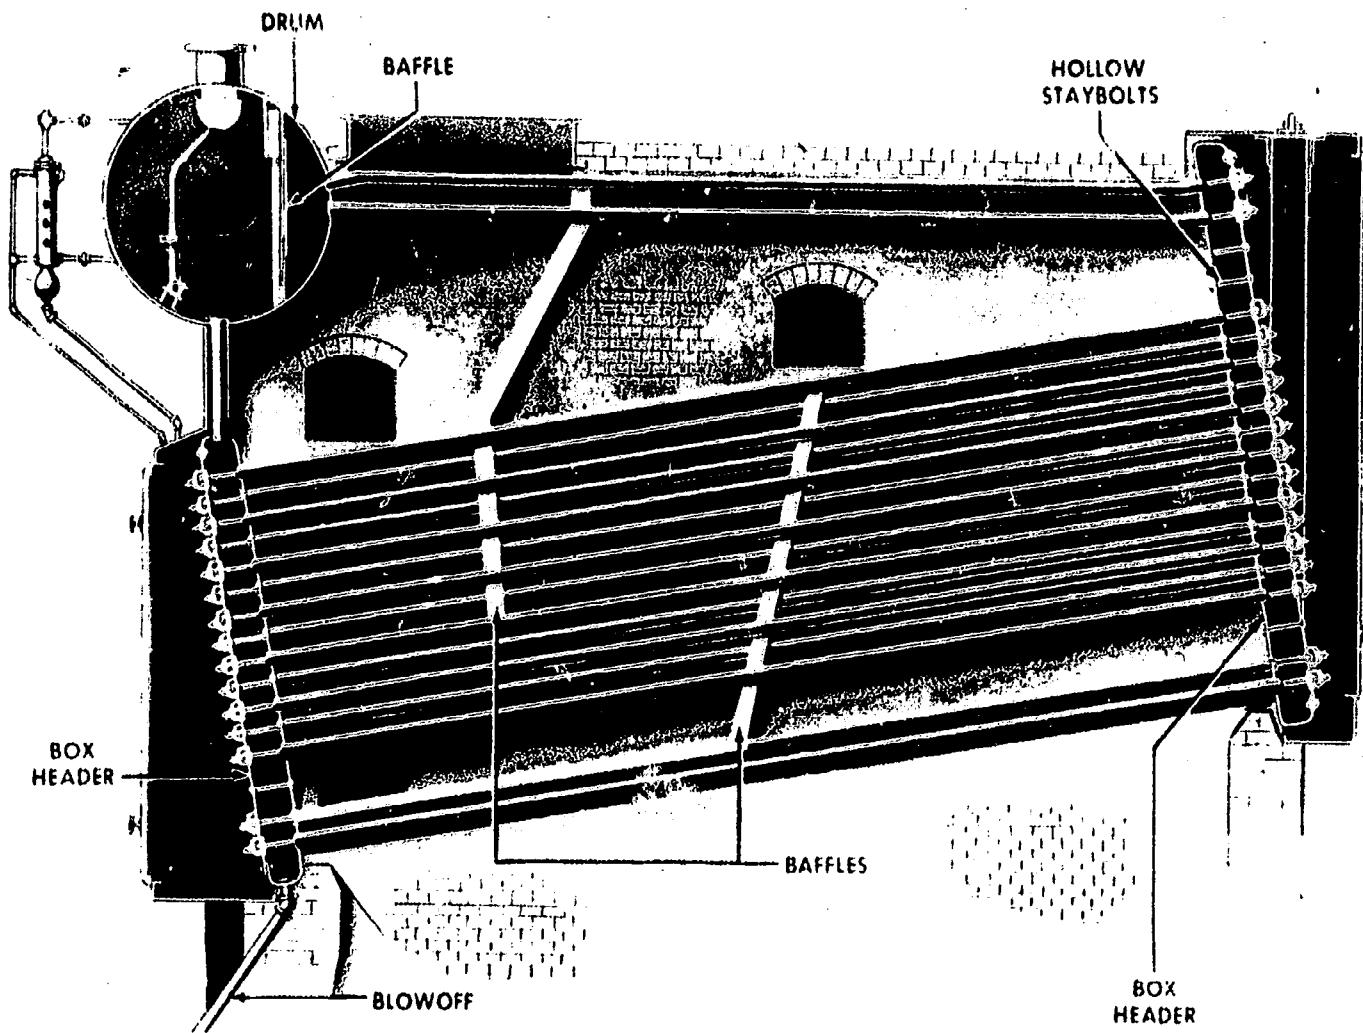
Sectional-header cross drum boiler (straight water tube).
